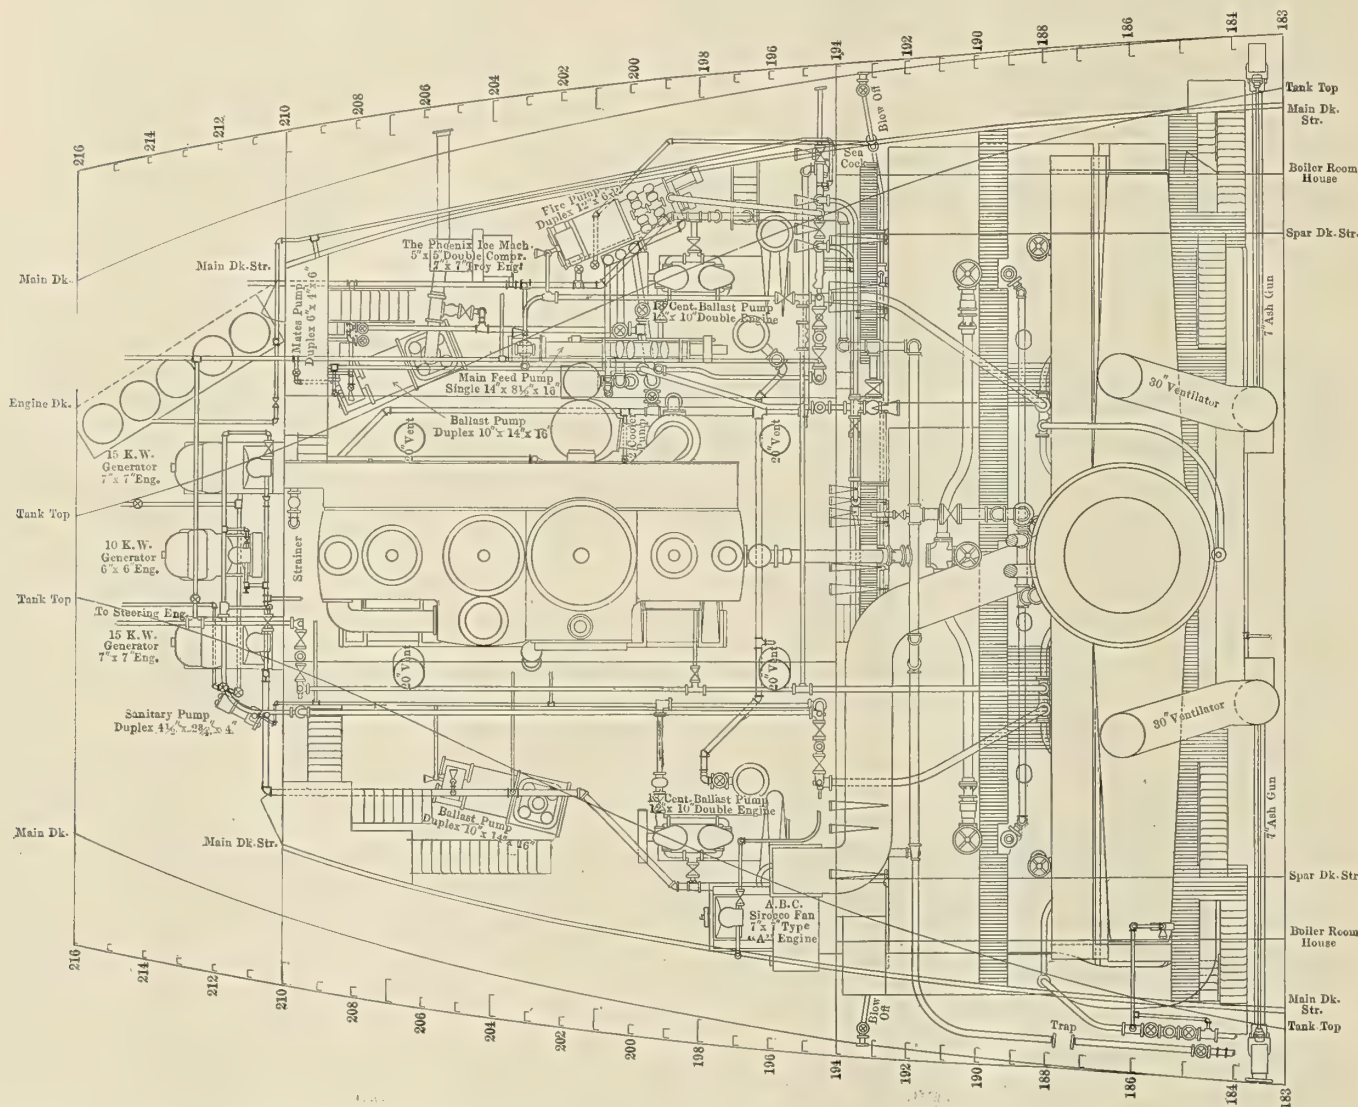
PLAN THROUGH MACHINERY SPACE
